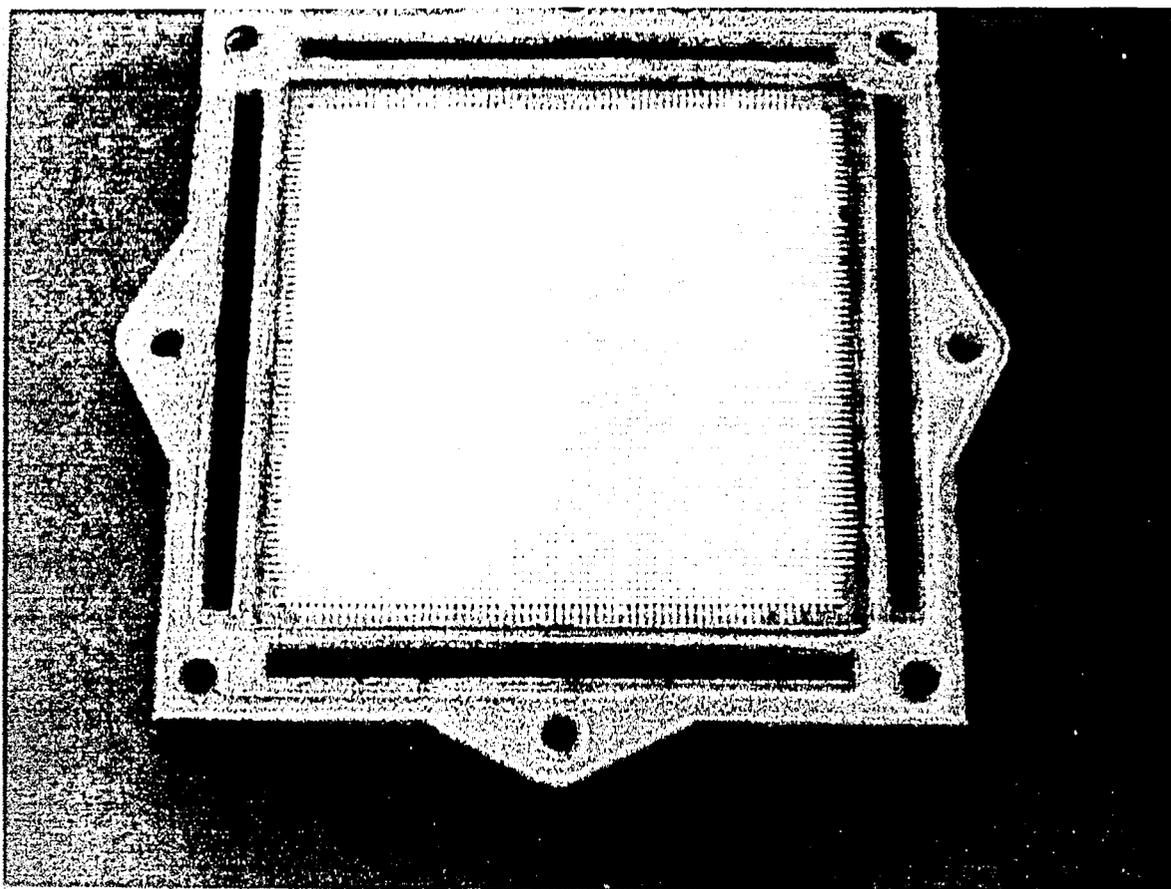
A four-layer high, eight clamping bolts transverse flow module
